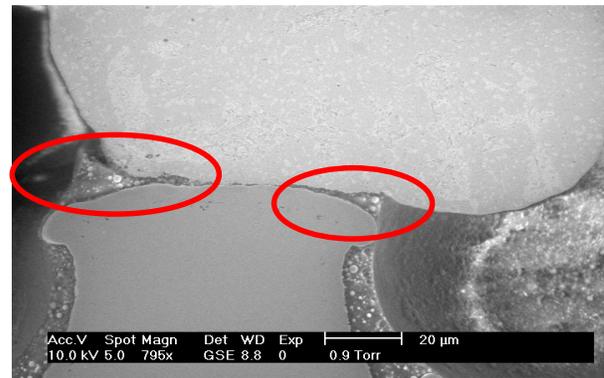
Thinner Fillets Around a Die Assembled with High Soak Temperature Reflow Profile Due to Limited Solder Joint Collapse
